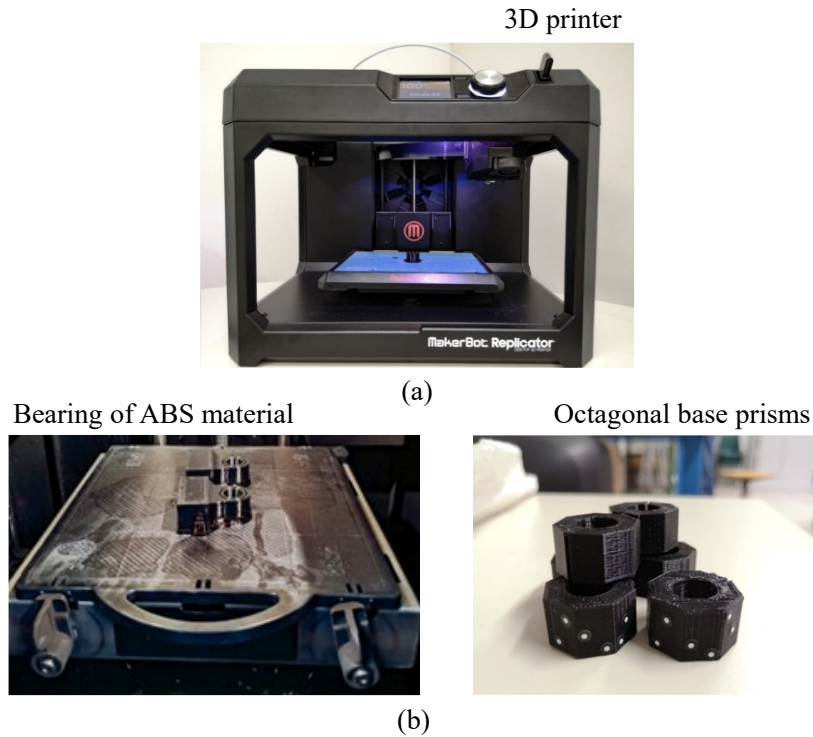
Custom-made fixing elements: (a) 3D printer and (b) realized components.
